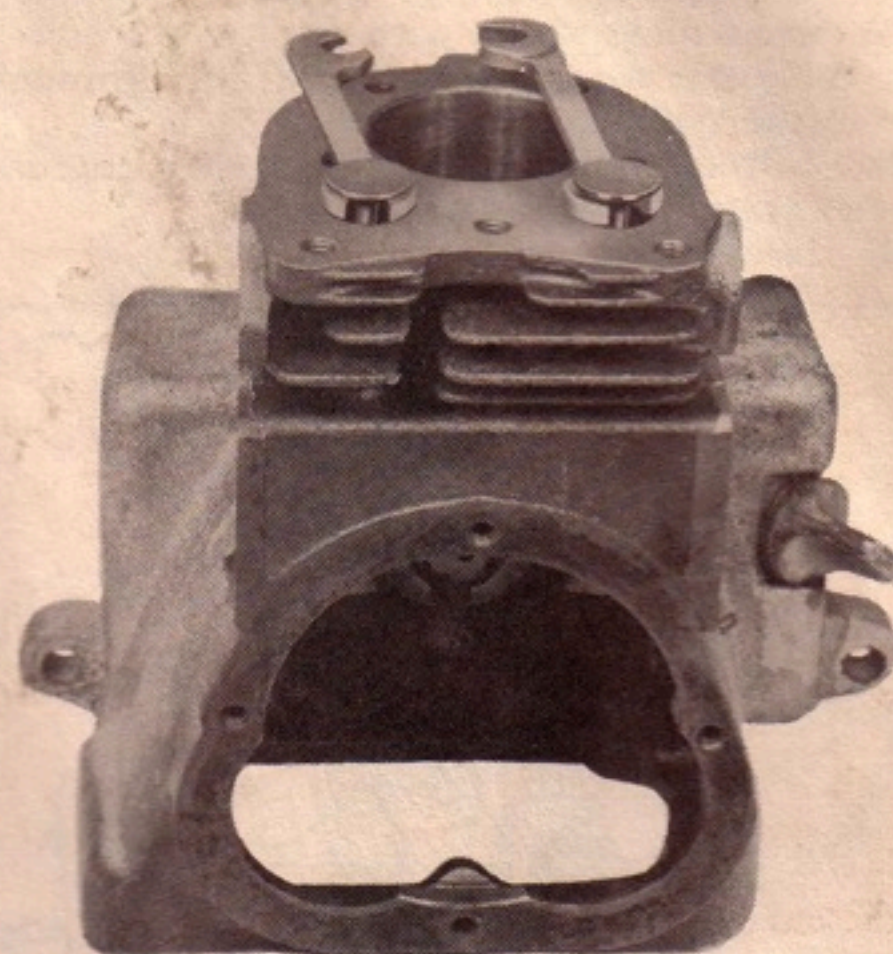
Holding Valve Out of Position—300 Series—Prepare the valves in a raised position as shown to simplify the assembly of the bearing plate and crankshaft assembly
